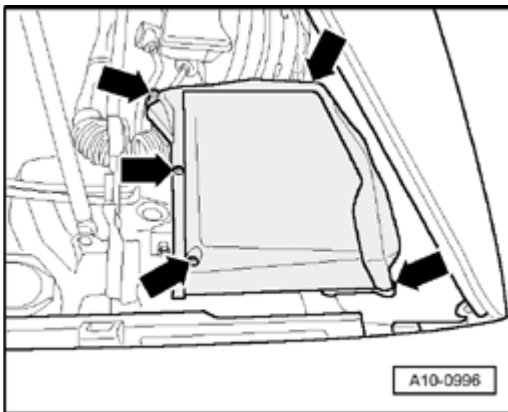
Removing Screws And Cover From E-Box In Plenum Chamber
